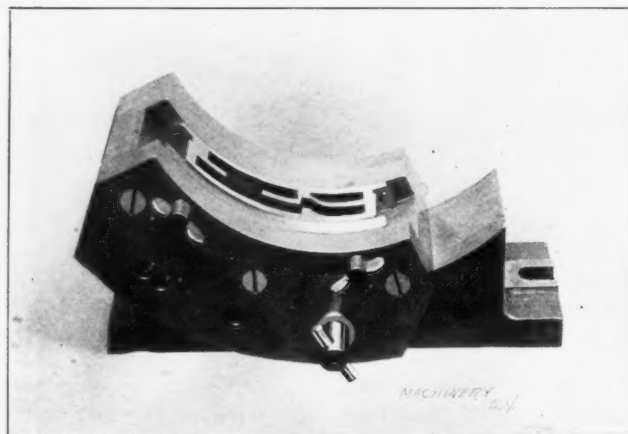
Slotting Fixture for the Quadrant of the Change Gear Lever
